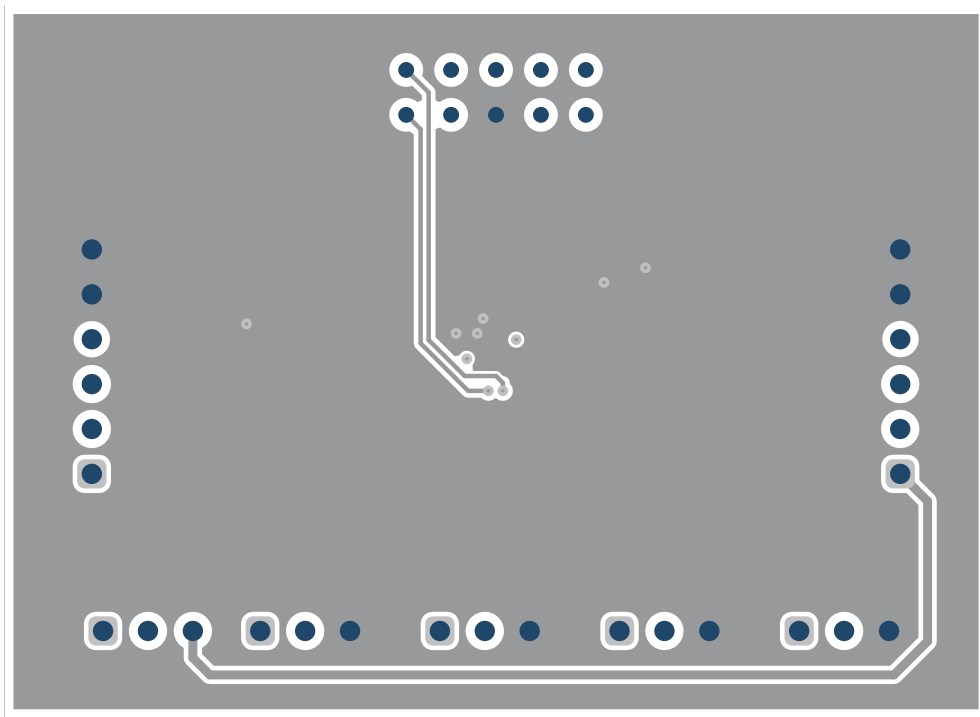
TPS6286x1EVM PCB - Signal Layer 2 (Top View)
